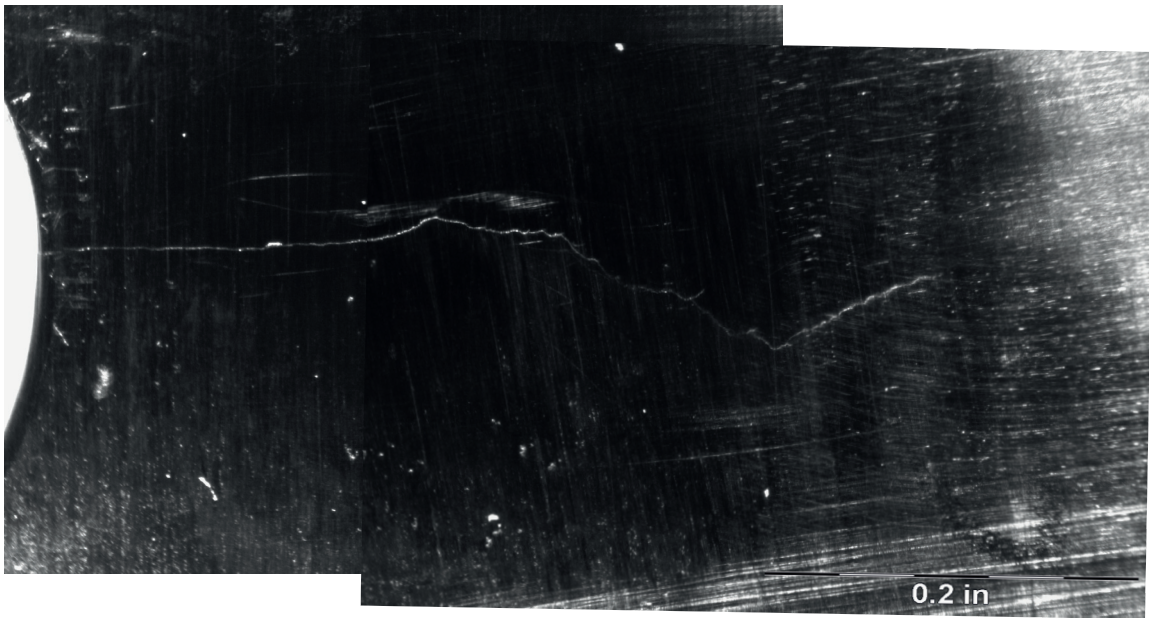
Image of Surface Crack in Coupon Cx4N1-08-D, Surface Crack Length is 0.5017 inch.
